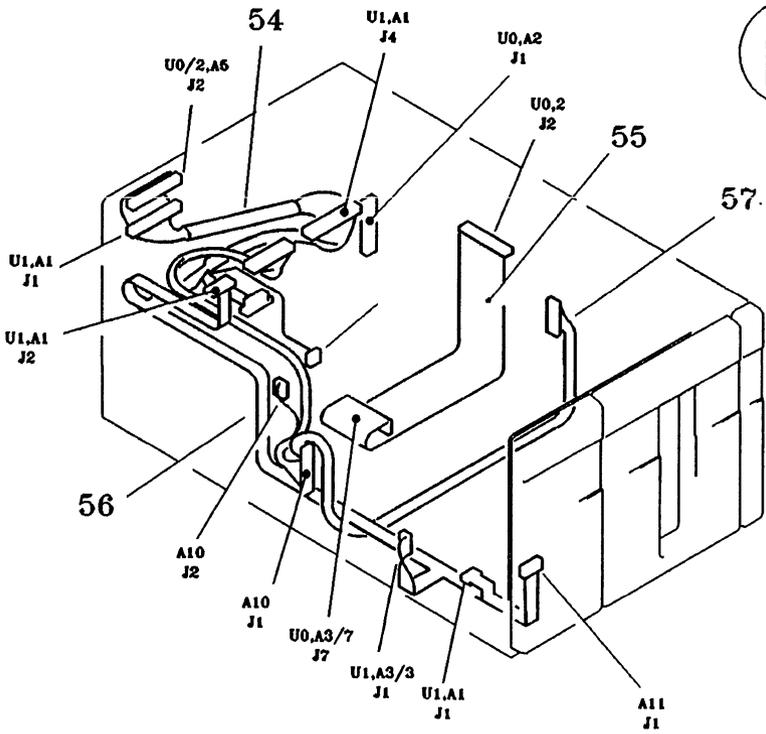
HP 35401A Cabling Layout (sheet 3 of 3)
